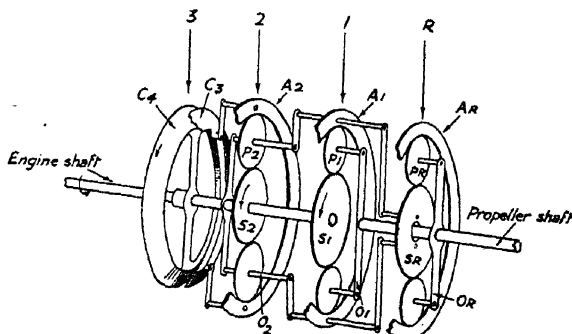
Principle of Wilson Three-Speed Gearbox.
